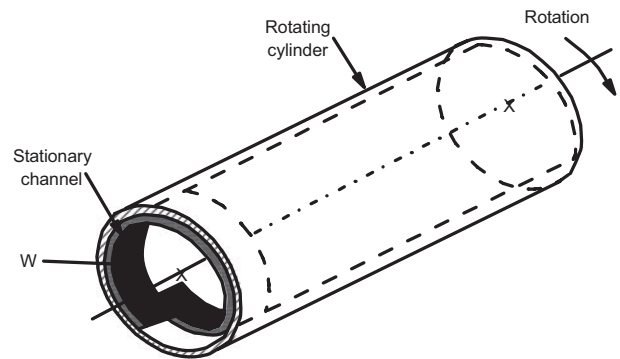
Principle of operation of the metering section of a single-screw extruder. A helical channel is machined in the inner cylinder. The fluid in the channel is dragged forward in the channel by the rotating cylinder.
